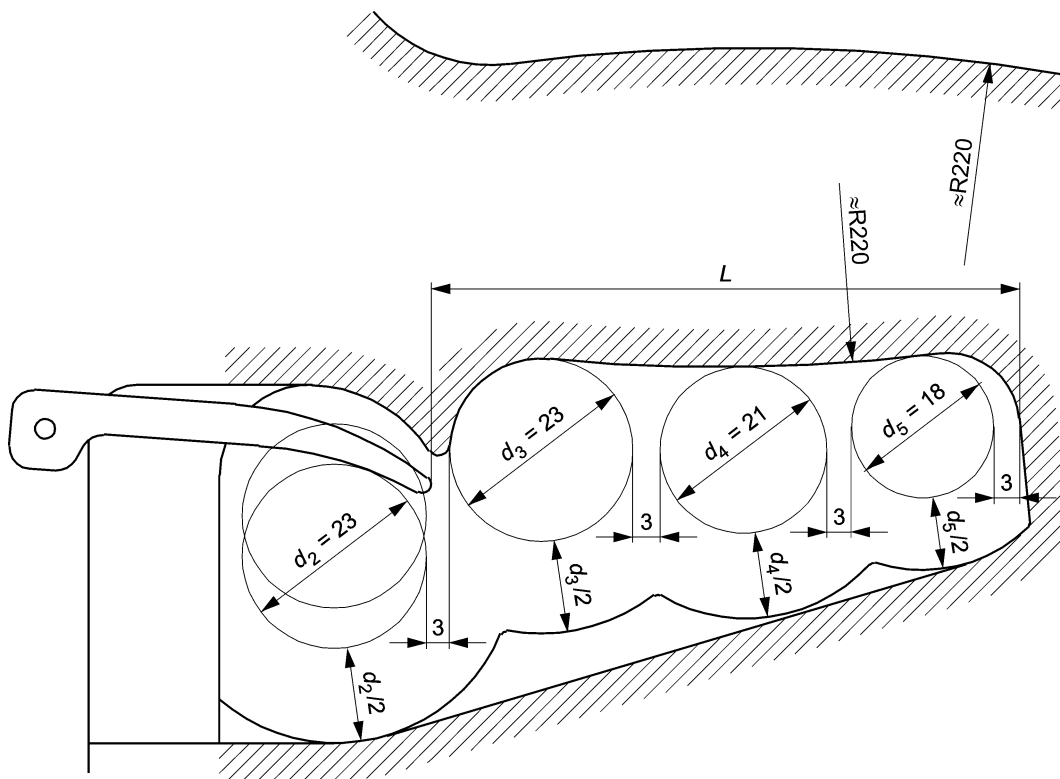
Example of handle dimensions on a cartridge operated tool
